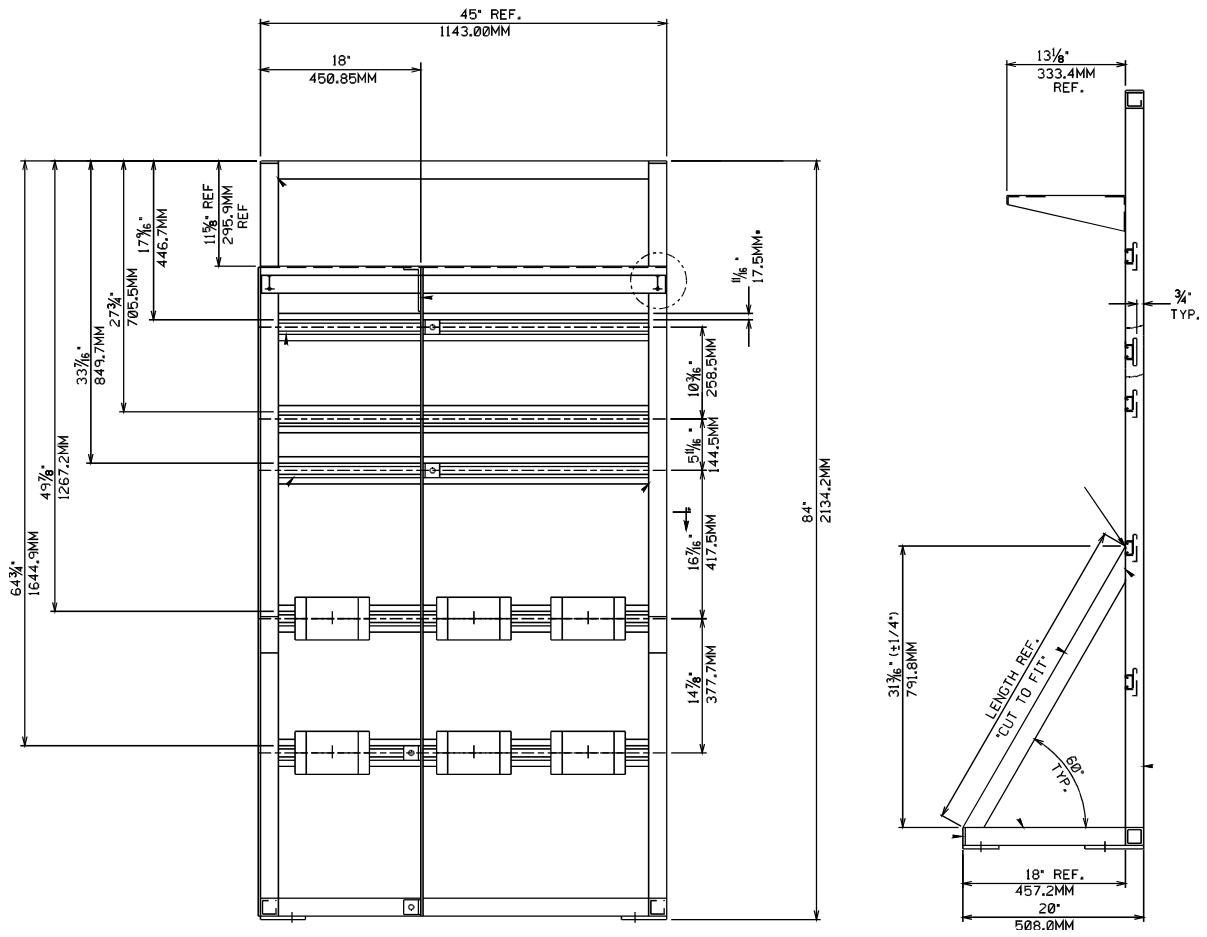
Outline Dimensions for Typical Silane Rack Assembly
